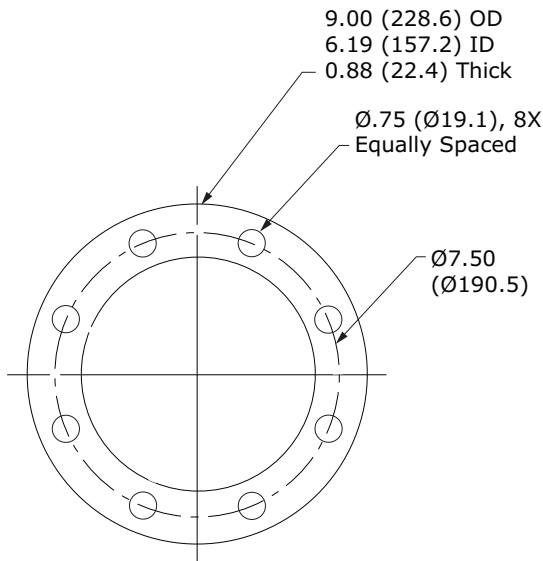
Four-inch (101.6 mm) RuptureGuard mounting, to 3-in. (76.2 mm) chiller flange
